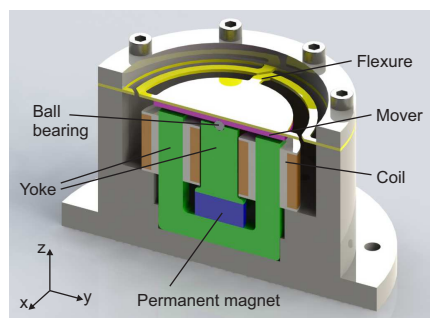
CAD cross section view of the hybrid actuator along one system axis. The permanent magnet (blue), the yoke parts (green) and the actuator coils (orange) are shown. The mover (magenta) rests on a ball bearing on the center yoke part and is suspended by a mechanical flexure (yellow).
